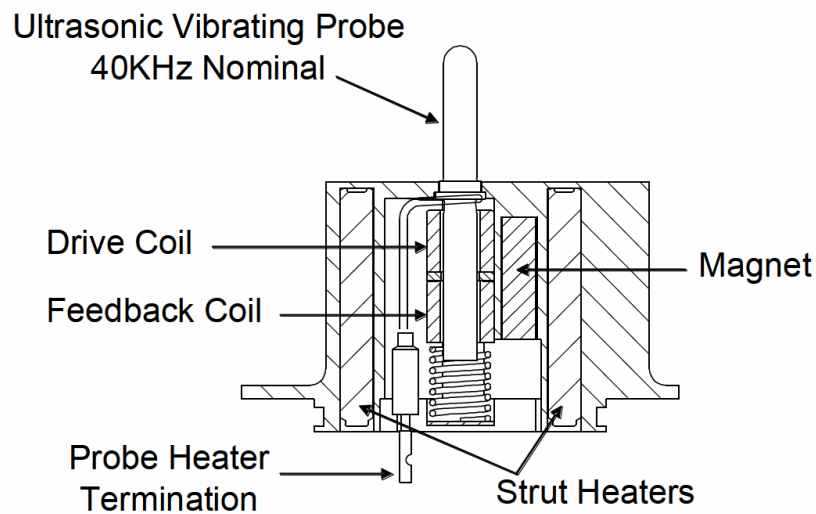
Assembly drawing of the 0871LH1 ice detector.
